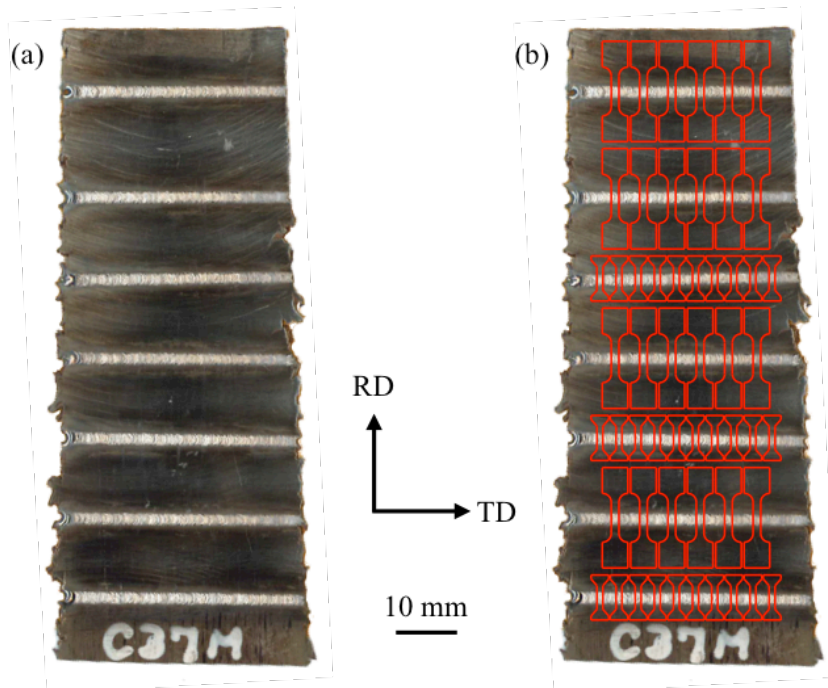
Image of cross-welds performed using laser welding techniques on the C37M alloy; (a) as imaged, (b) with overlays of SS-J2 and SS-2E sample geometries to show where samples were fabricated from in Section 3.1.4.
